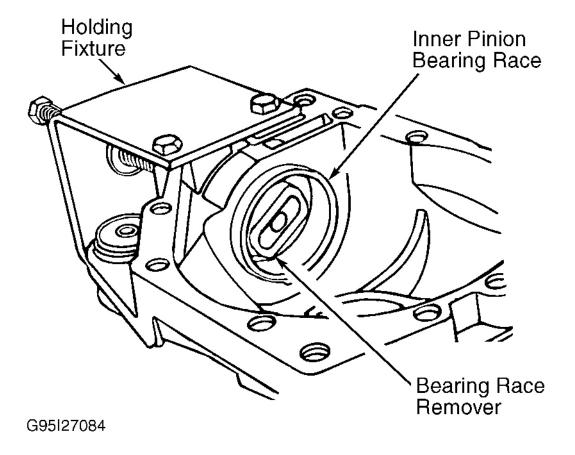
Removing Inner Pinion Bearing Race Courtesy of GENERAL MOTORS CORP.
